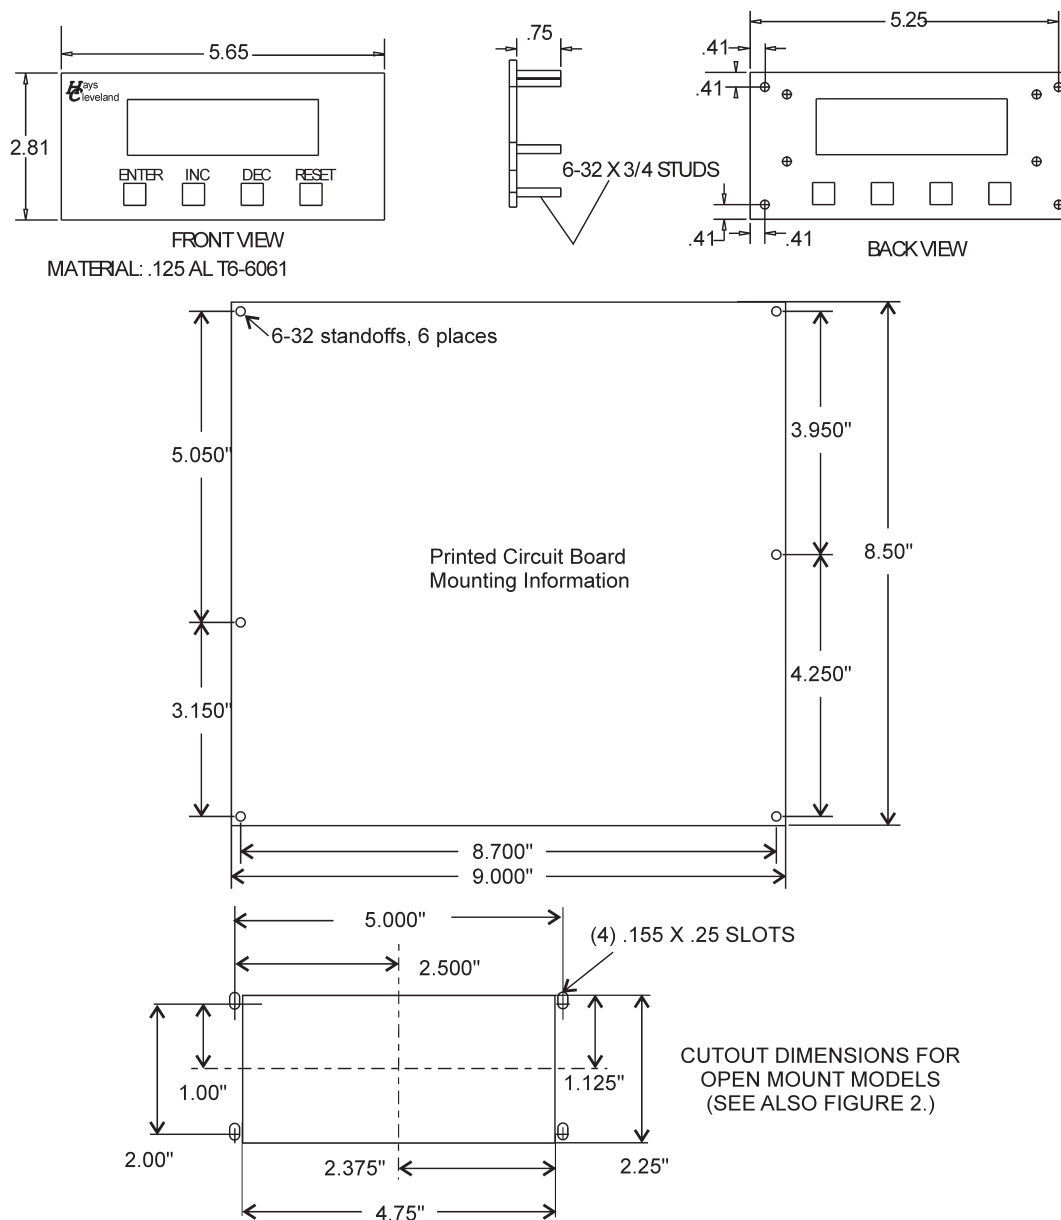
Panel Mounting Dimensions: C-07720 Draft Control System (open mount models).
